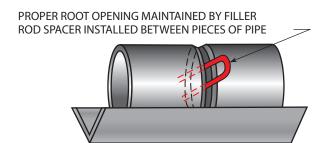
Use a spacer like a piece of filler metal to set the root gap.
